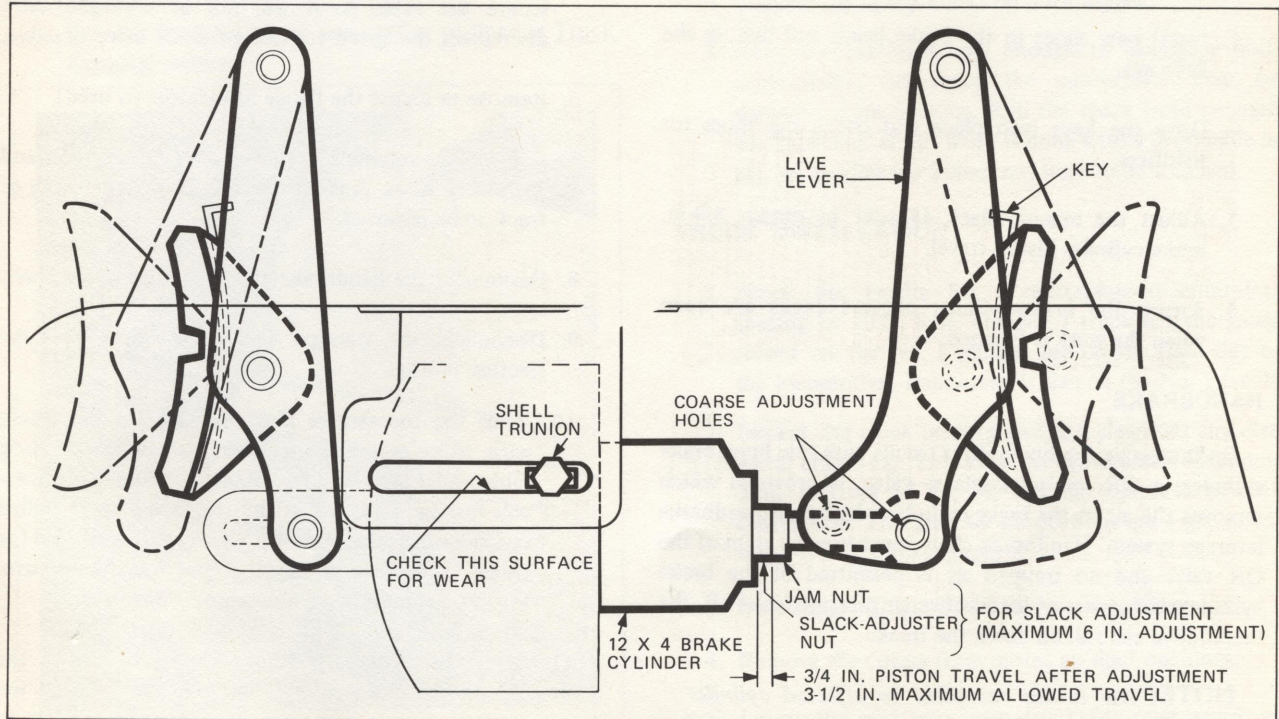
BRAKE-RIGGING ARRANGEMENT.
